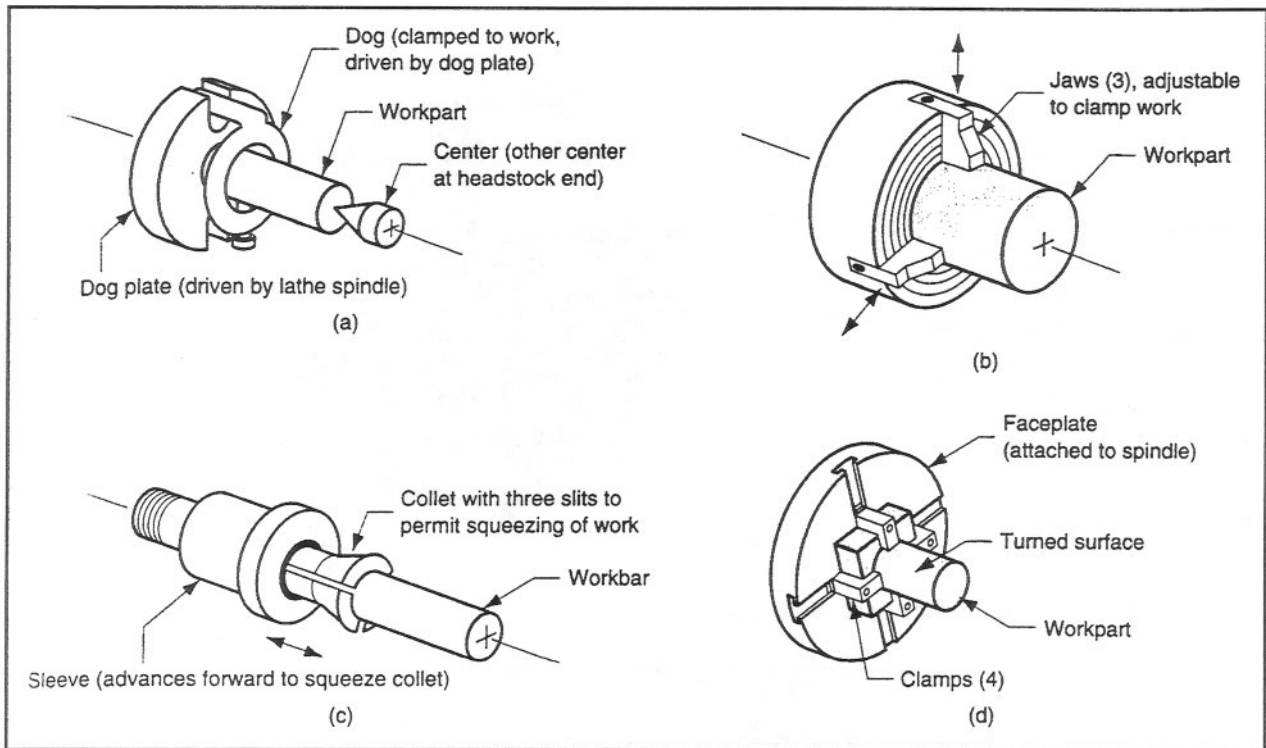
Four fixturing methods used in lathes: (a) mounting the work between centers using dog, (b) three-jaw chuck, (c) collet, and (d) face plate for noncylindrical workparts.
